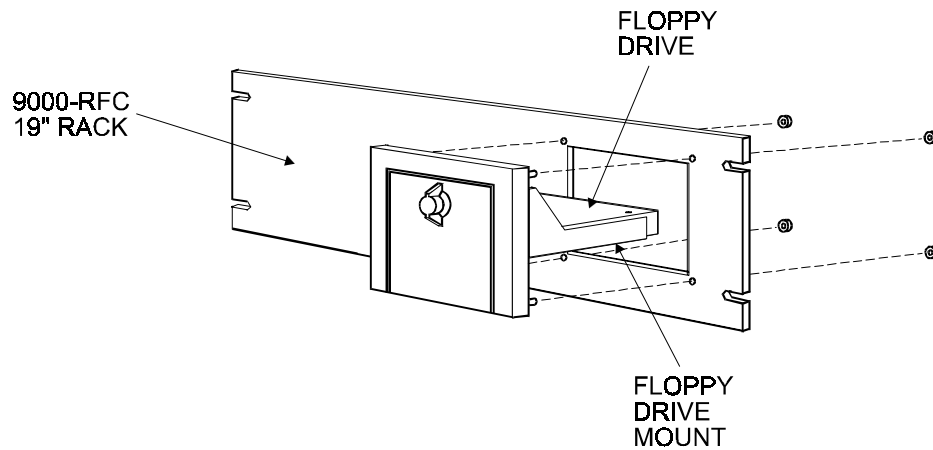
7. Floppy Drive - Front Mounting Option
